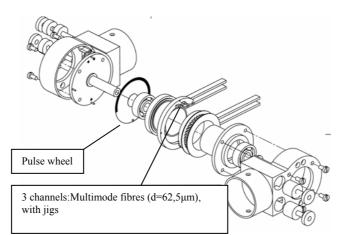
Designed and manufactured robot joint with mounted pulse wheel and three fibre optical channels.
